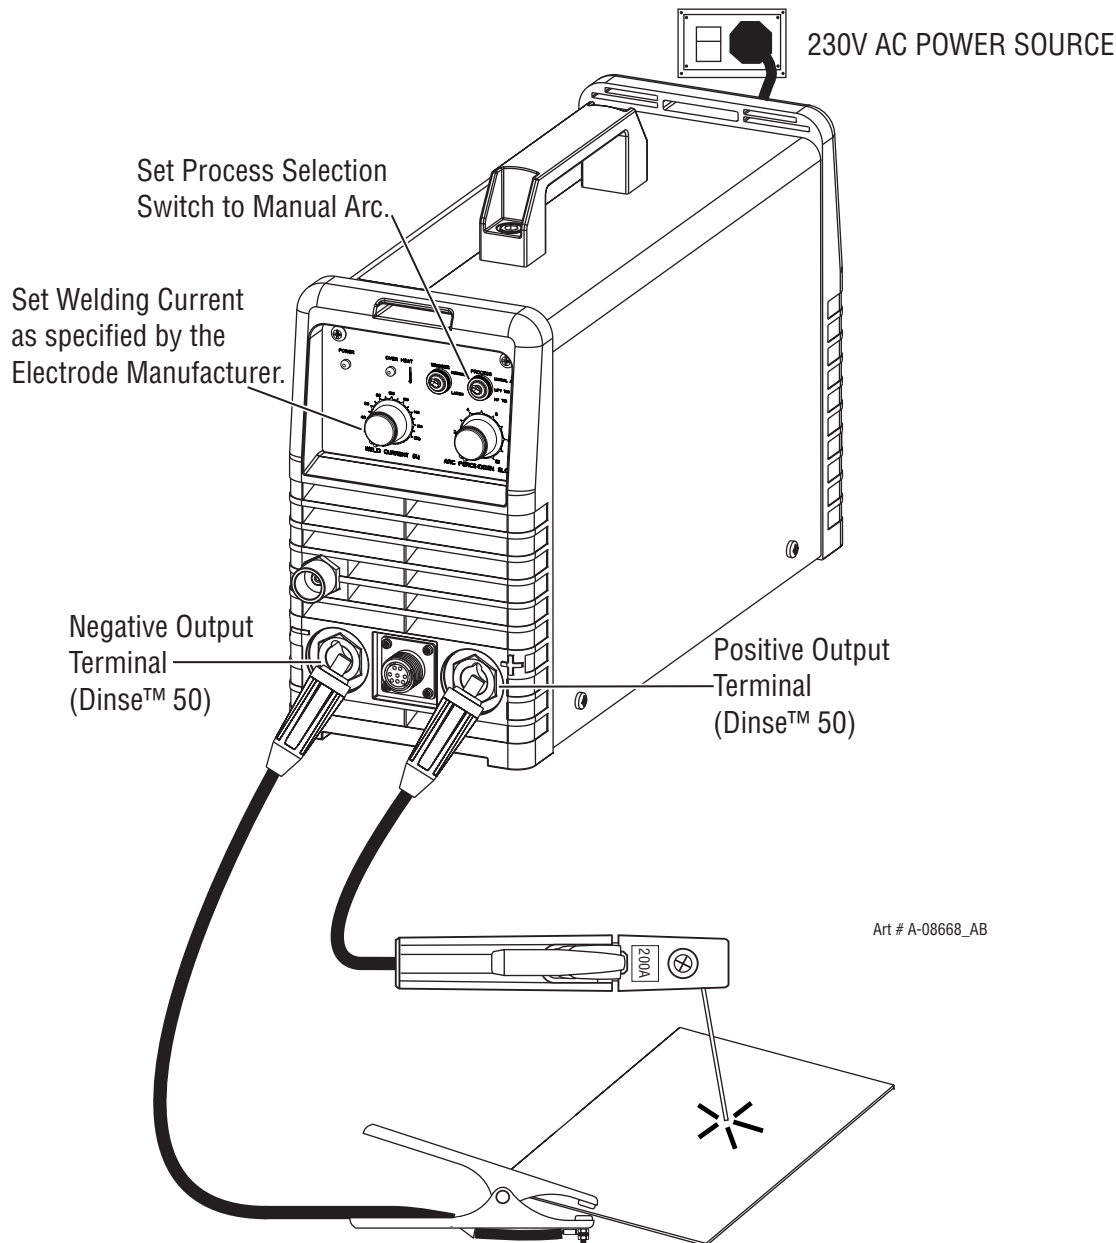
Setup for Manual Arc (STICK) Welding
